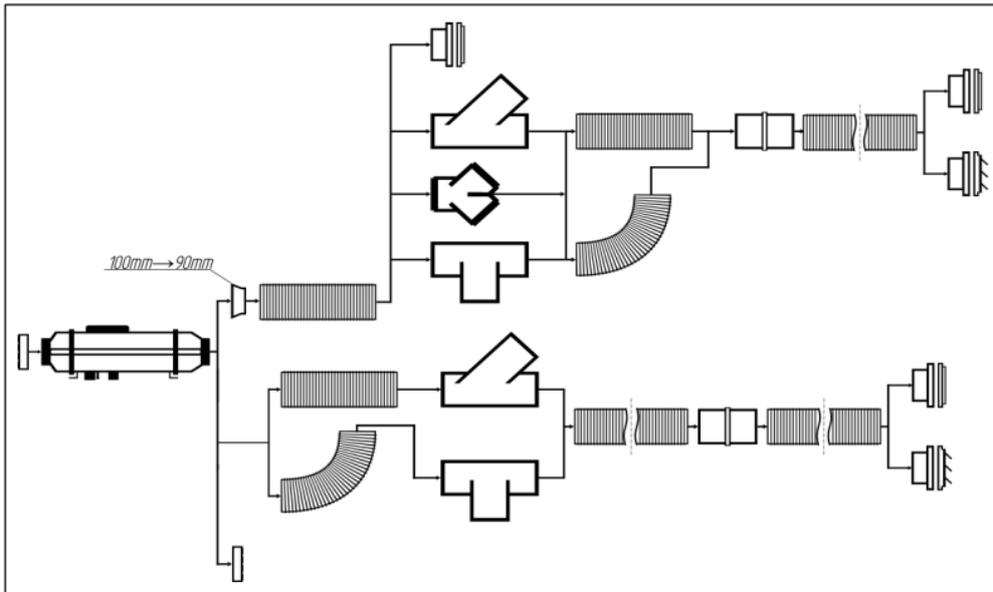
Air duct connections for AIR- 9D (100mm/90mm)
